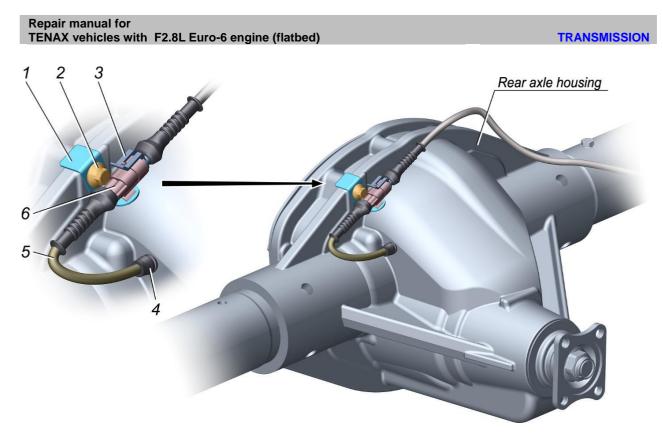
Differential control wiring harness terminal attachment: 1 – bracket; 2 – bolt; 3 – car wiring harness receptacle; 4 – wiring harness seal; 5 – differential solenoid harness; 6 – pin shoe
